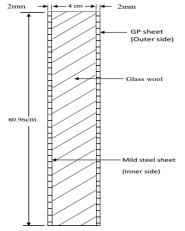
Dimensional view of reactor shield pyrolysis reactor.
